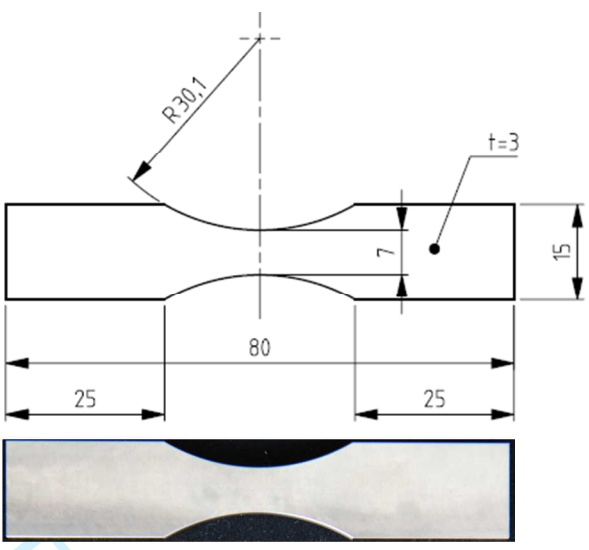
Dimensions of LENS Ti-6Al-4V specimens.
